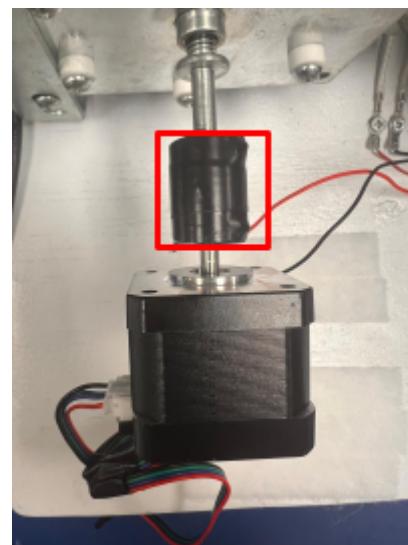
Stepper Motor Coupler with Tape (JL)
